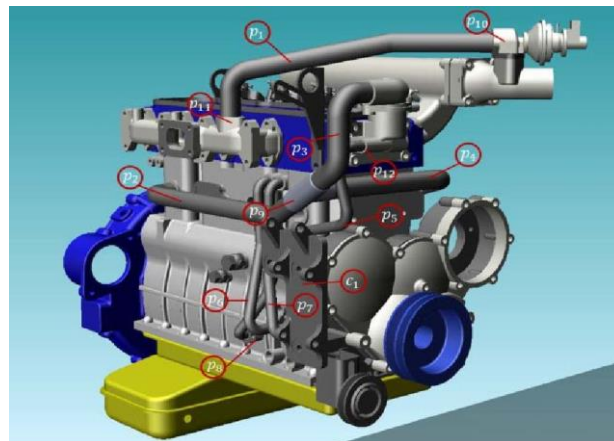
Automatic Generation of Pipeline Disassembly Sequence
